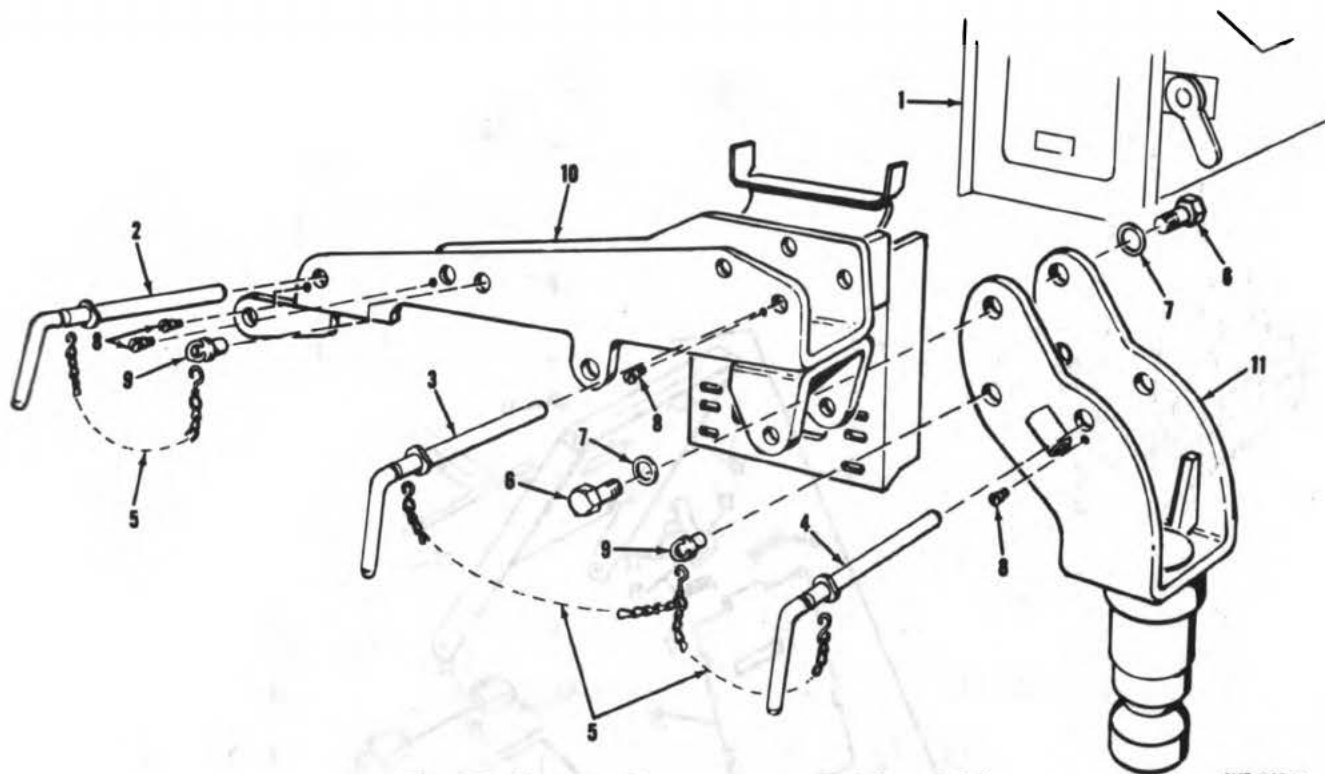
Mount, machine gun—6590045—partially exploded view.
